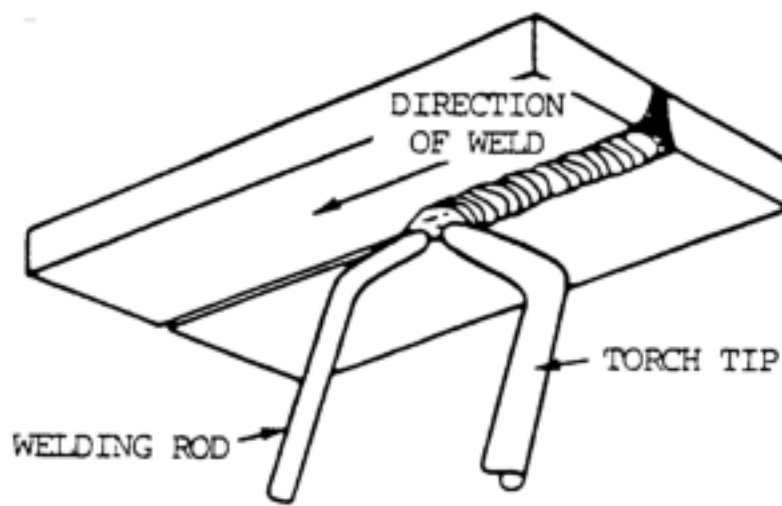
Welding a butt joint in the overhead position.
